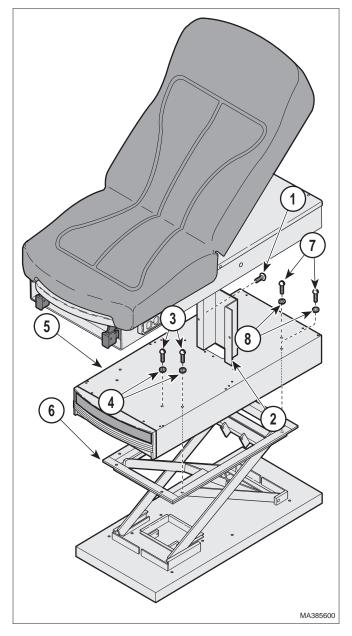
Hydraulic Base Cylinder Removal / Installation
